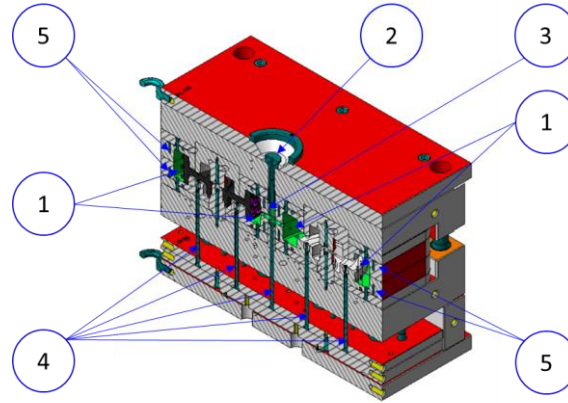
Section view of the reconfigurable mould, for the A version wheel, with two cavities.
